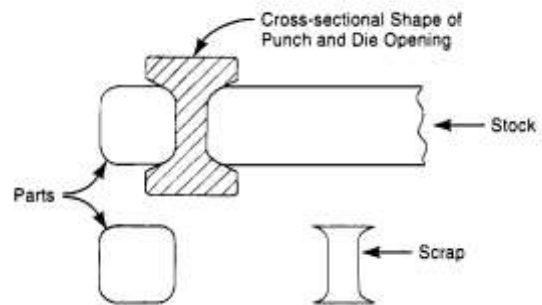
A parting punch is used to make separate pieces from strip material when the end edges do not mate.
